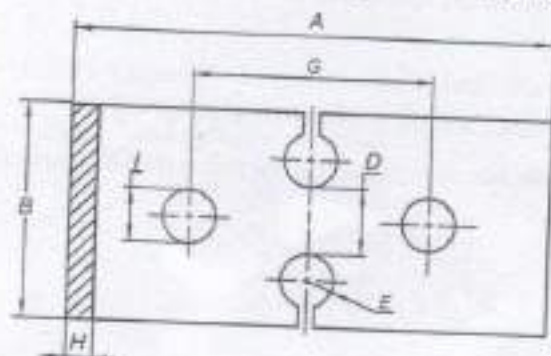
MACHINED TYPE A TENSILE TEST PIECE
